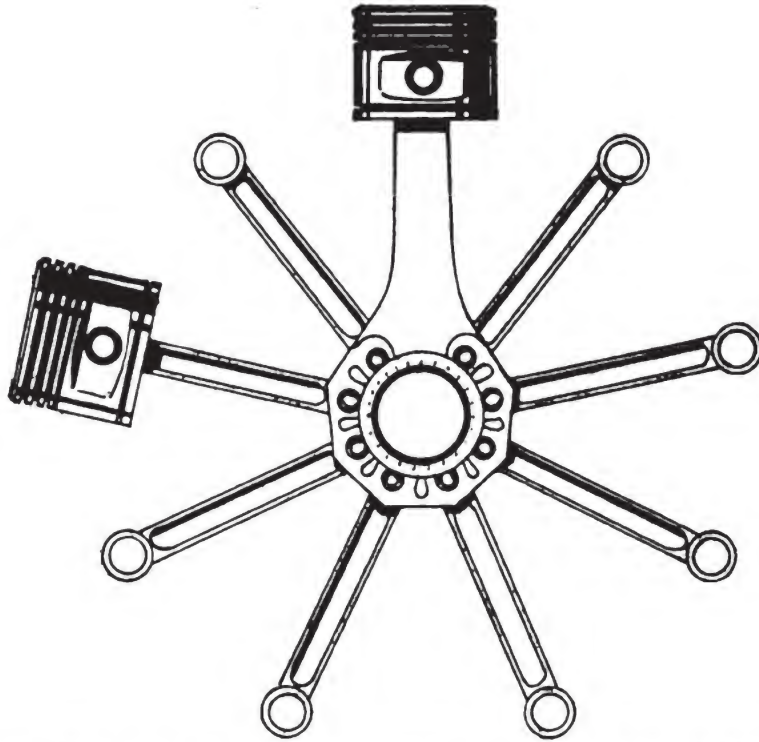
Master connecting rod assembly. Knuckle pins of forged steel hold the connecting rods to the master rod.
